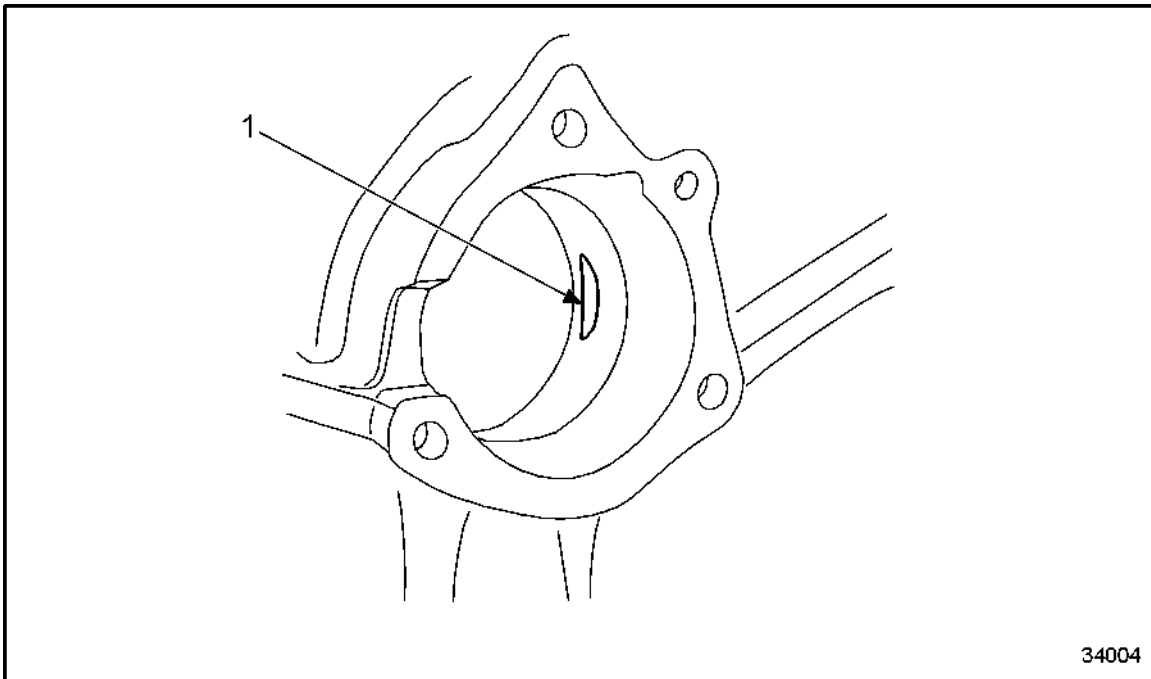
Viewing Main Oil Supply Bores to Camshaft and Main Bearing with Borescope
